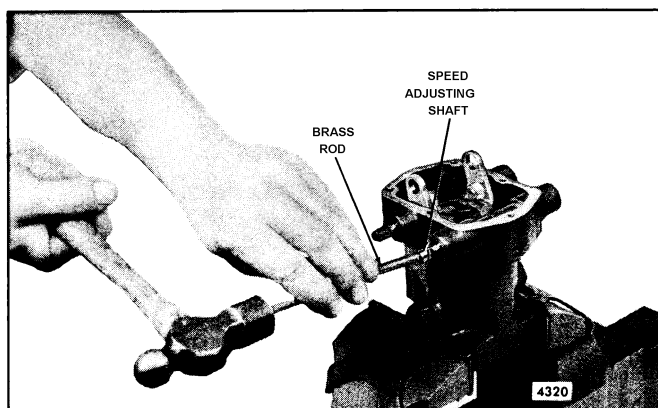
Removing Speed Adjusting Lever Shaft Cup Plug from Governor Housing
